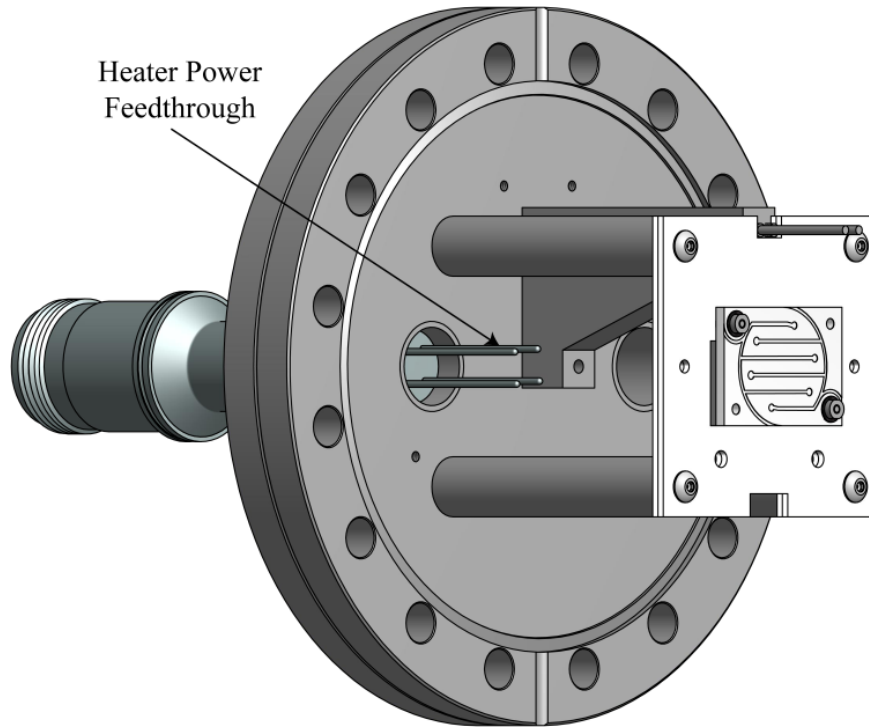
Schematic of assembled heater on stage and corresponding electrical feedthrough used to supply power to the heater. The wires connecting the feedthrough and the heater are not shown.
